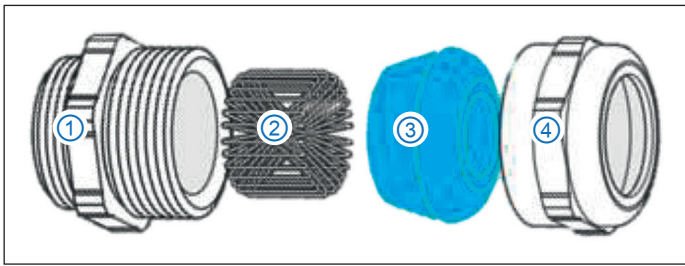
Components of a cable gland with triangular spring 'TRI' contacting the braided shield
